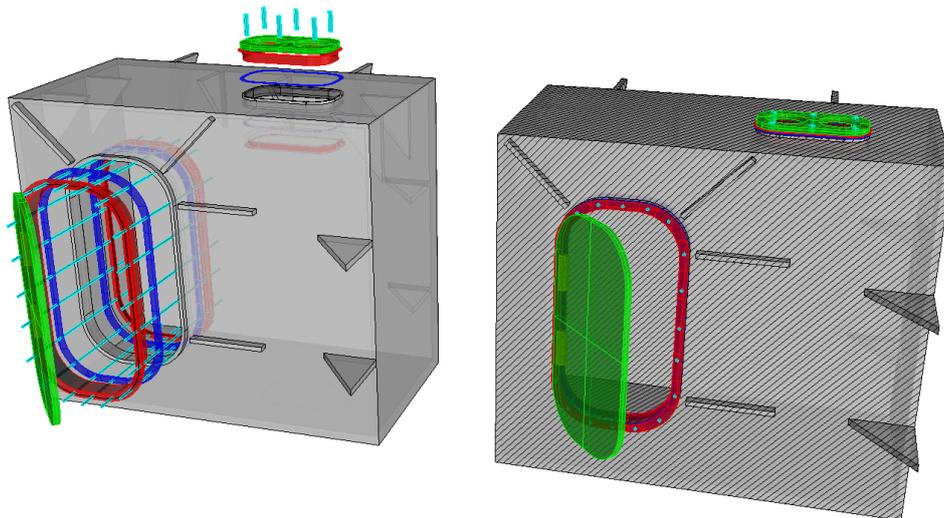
Examples of a watertight door, a fitting and a series of lightening holes inside the double bottom.
